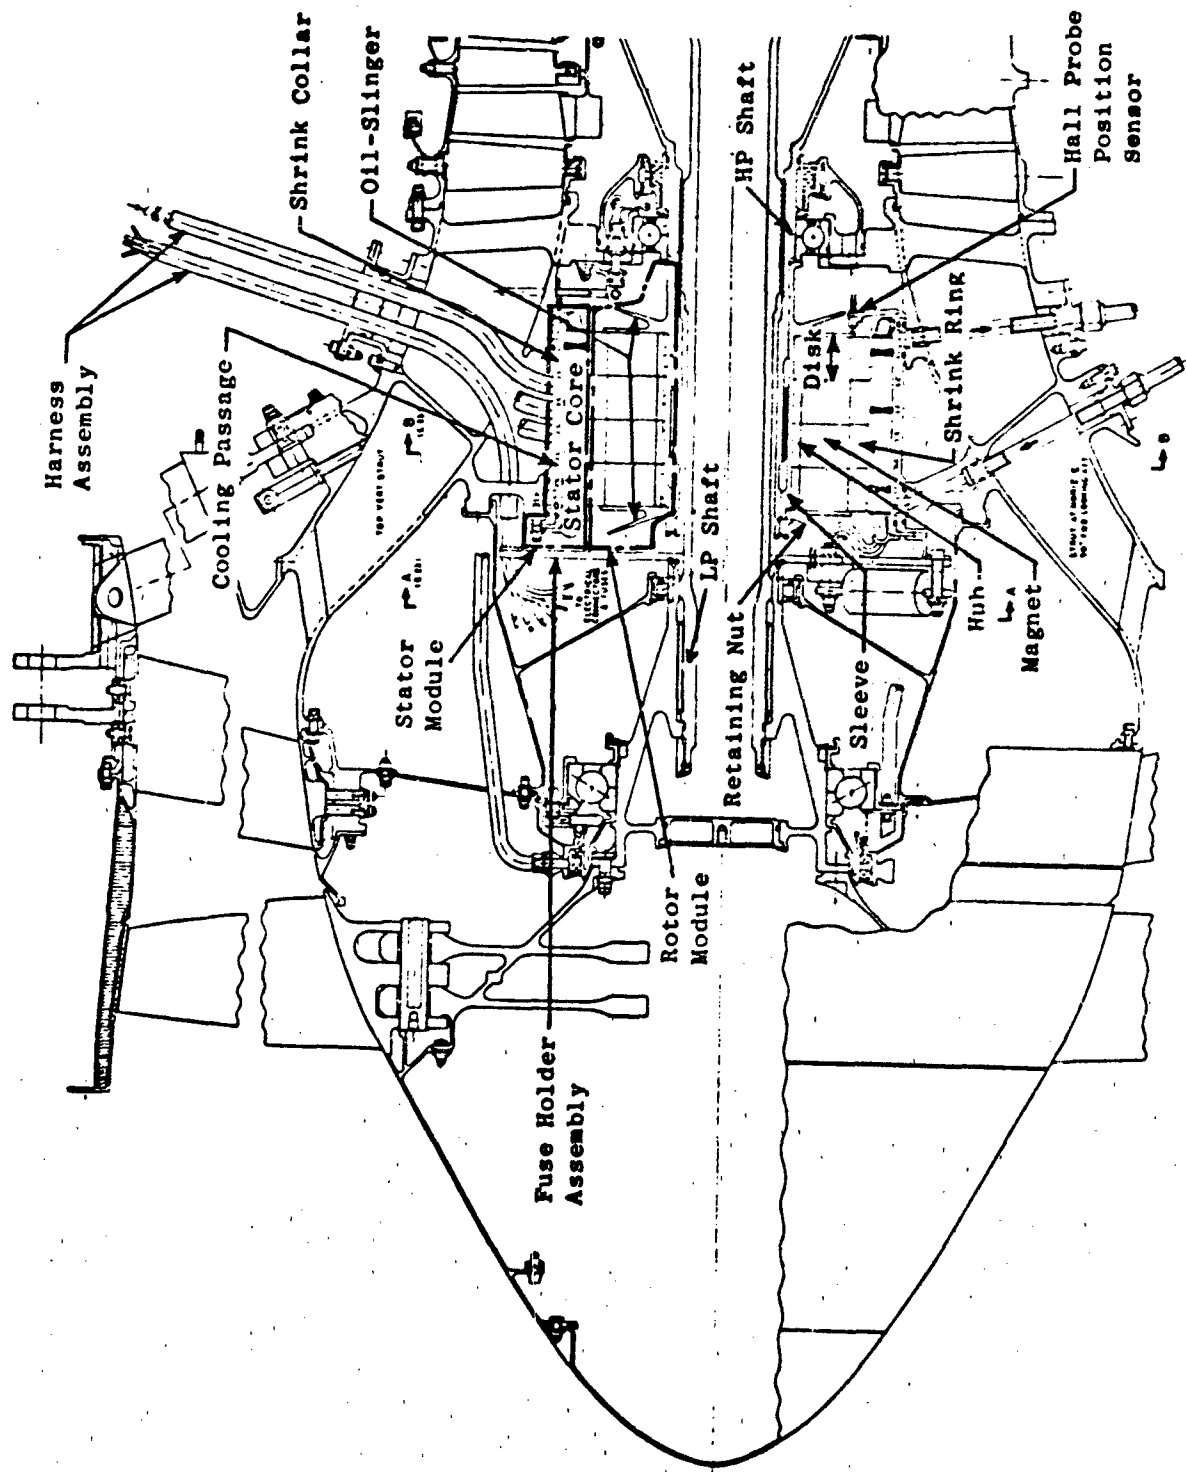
High-Pressure-Shaft-Mounted IEG/S Permanent Magnet Machine for TF34.
